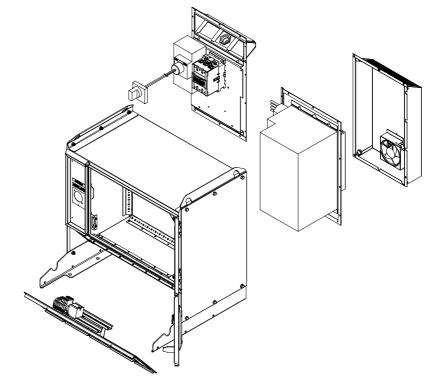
Exploded view drawing of the Spot Welding cabinet.
